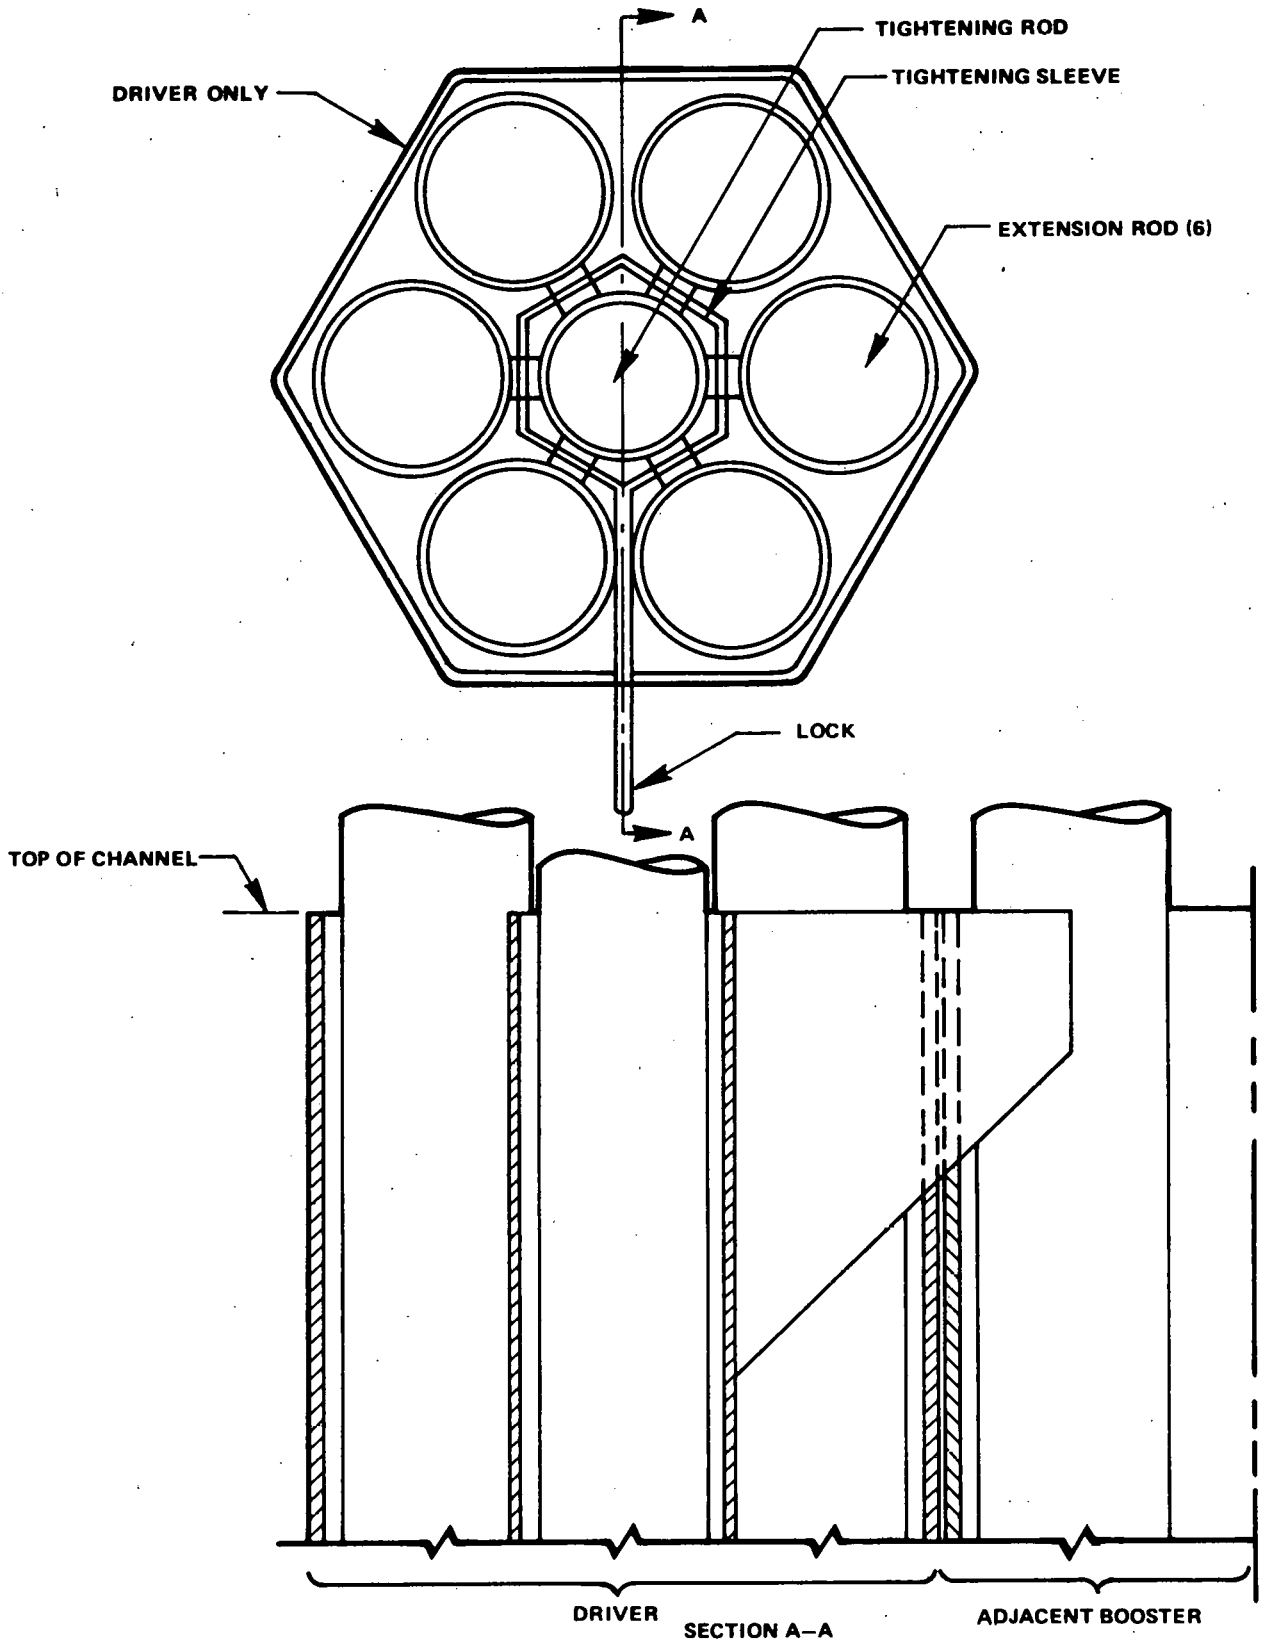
B3-27. Loading Sequence Interlock Provisions, Booster-Driver Assemblies
